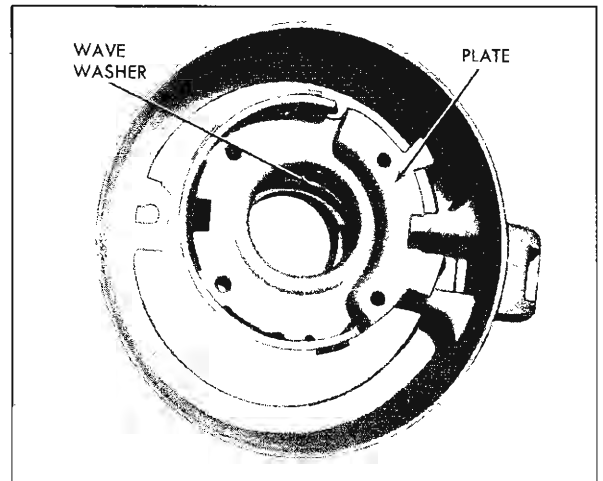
Lock Plate, Wave Washer and Shift Lever Support Housing
